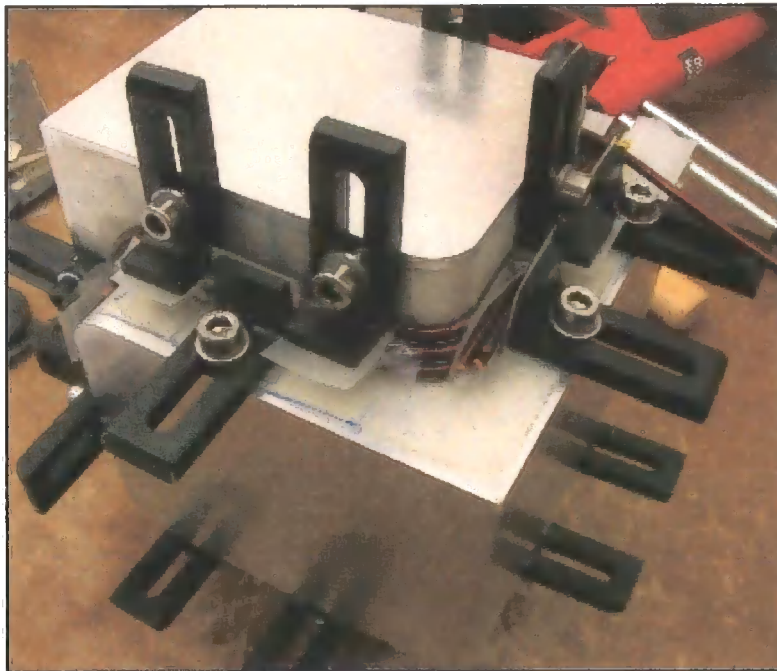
Baseball Coil during construction upon the aluminium former. Metal clamps and extra pieces of copper wire were used to hold the turns in place whilst the epoxy set. Note the use of Mylar film to prevent the Baseball Coil being glued to the assembly structure.
